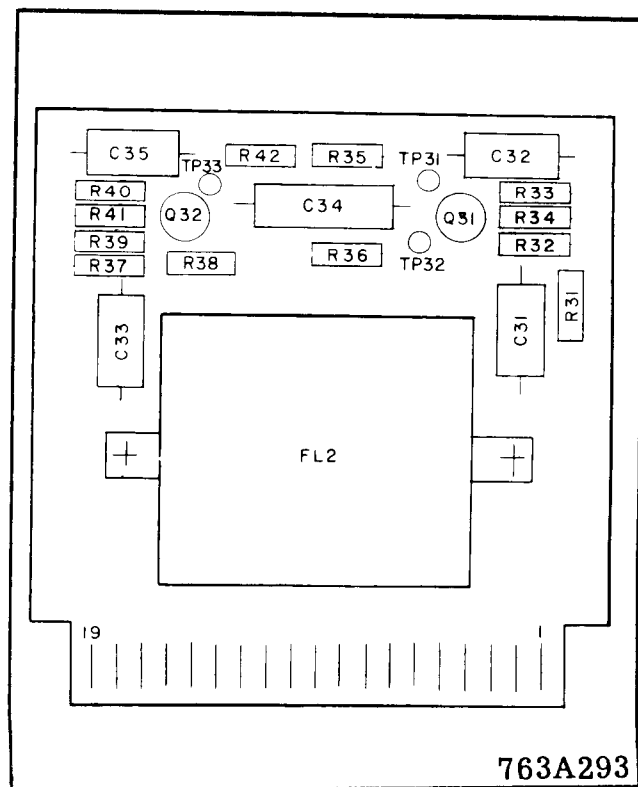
Component locations on the I.F. amplifier printed circuit board.
